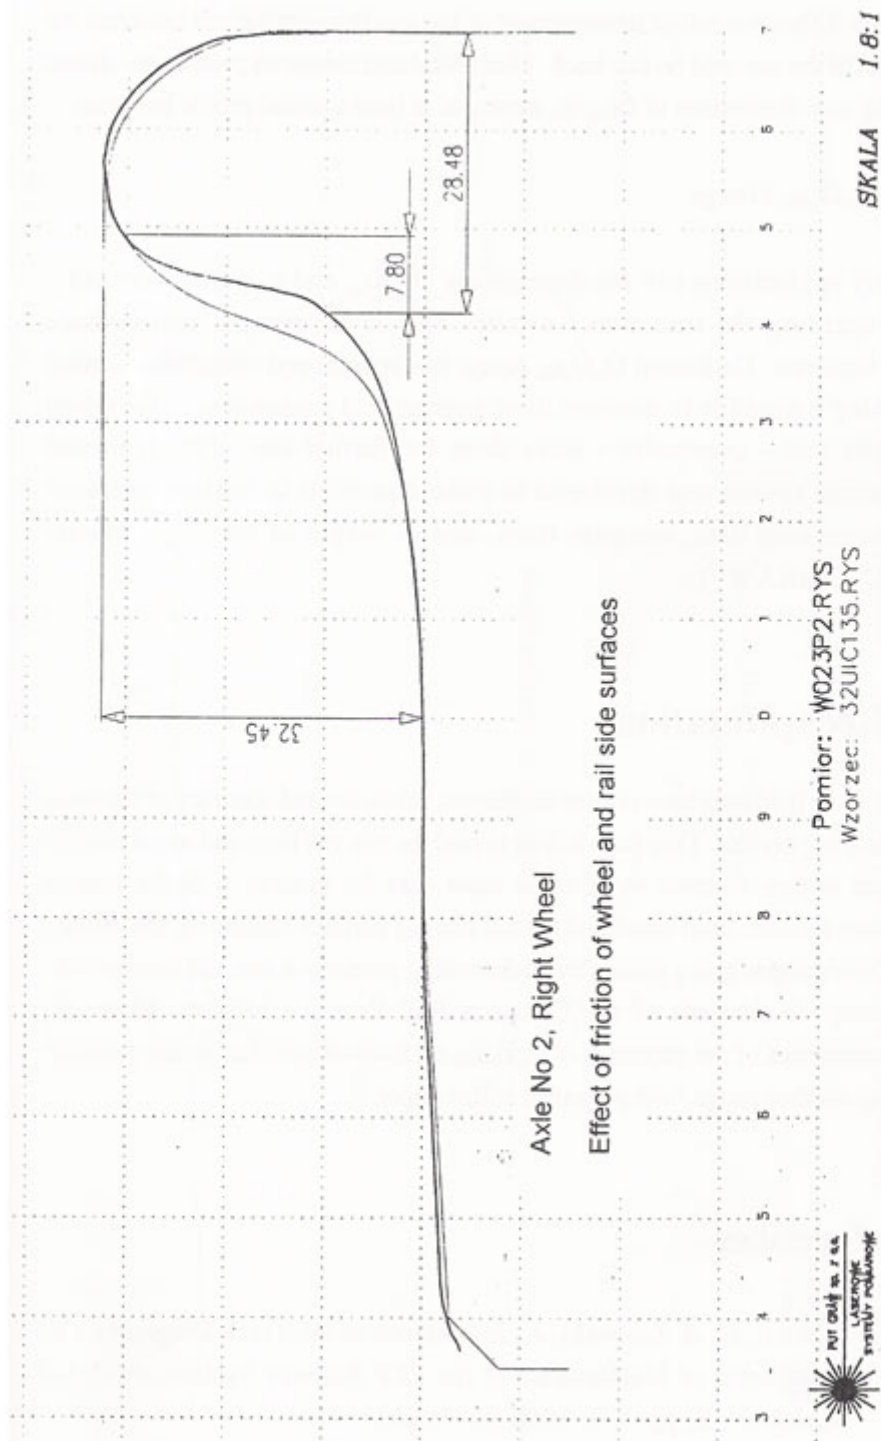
Worn out wheel running surface profile; dimensions were added in user selected locations
